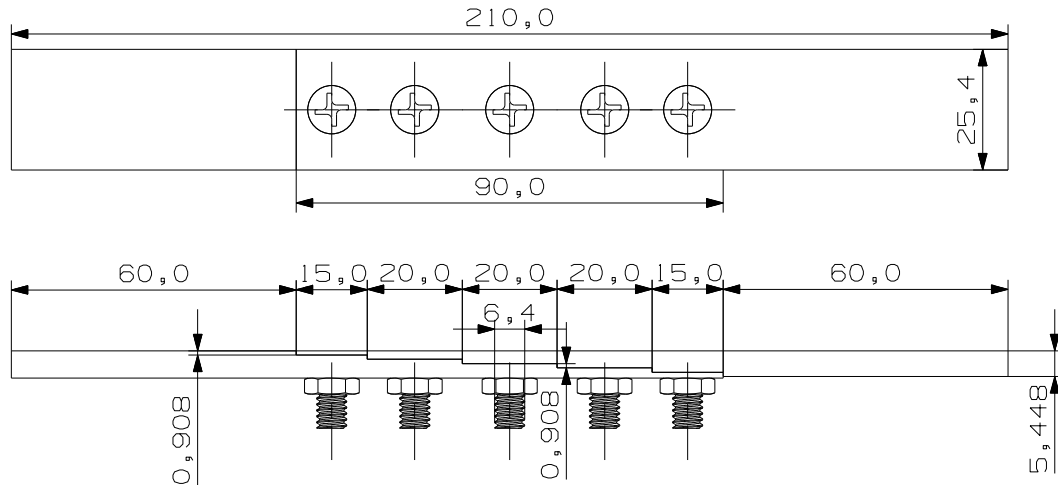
Step lap joint containing five bolts in a single column array; dimensions in mm
